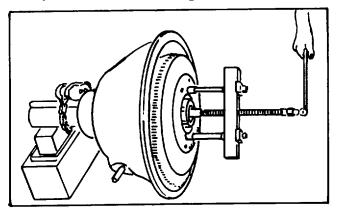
Loosening 14 Inch Diameter Clutch Assembly from Clutch Drive Shaft.
